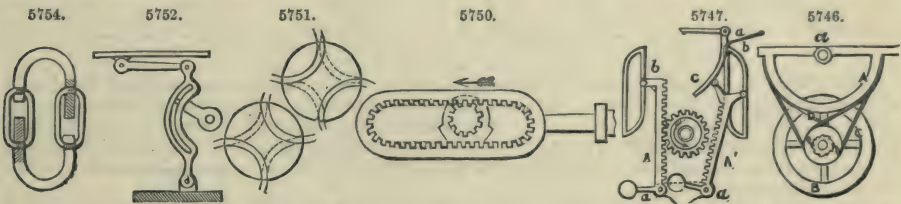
C. Parsons's device for converting reciprocating motion into rotary, an endless rack provided with grooves on its side gearing with a pinion having two concentric flanges of different diameters. A substitute for crank in oscillating cylinder engines.
